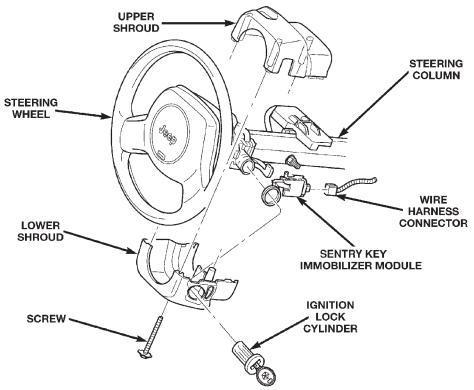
Sentry Key Immobilizer Module Remove/Install
